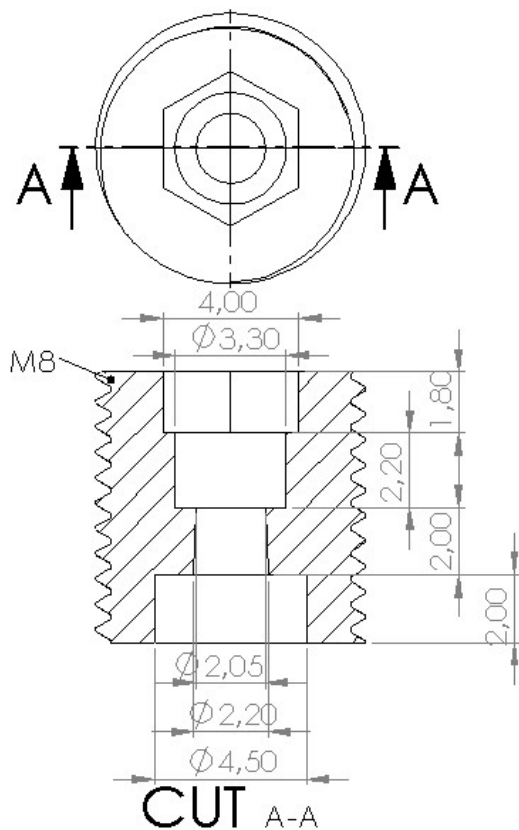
Technical drawing of the 3D-printed screw cap for fixing SensorPlug inside its respective port.
